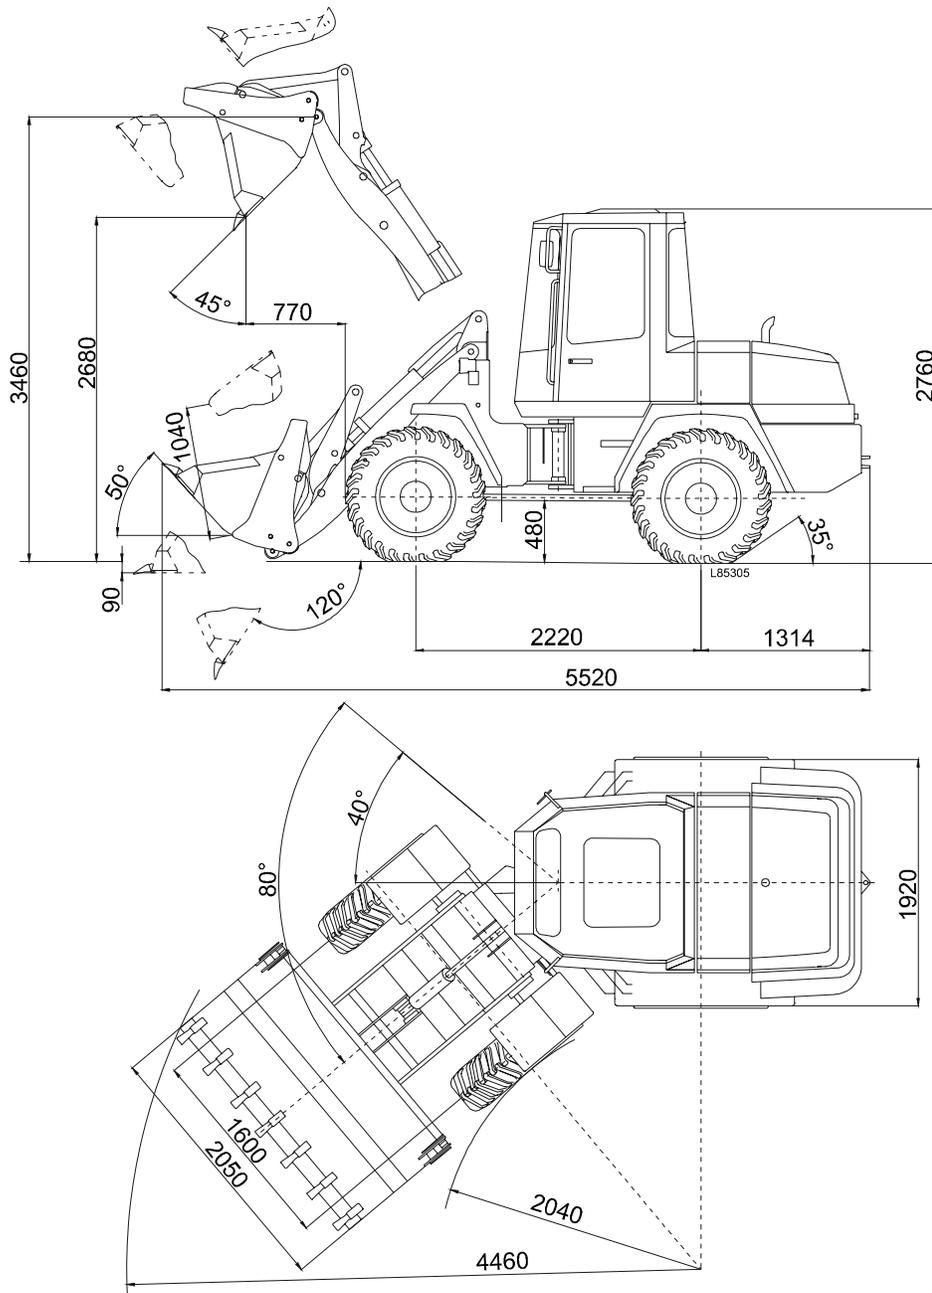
Dimensioned drawing with multi-purpose bucket
